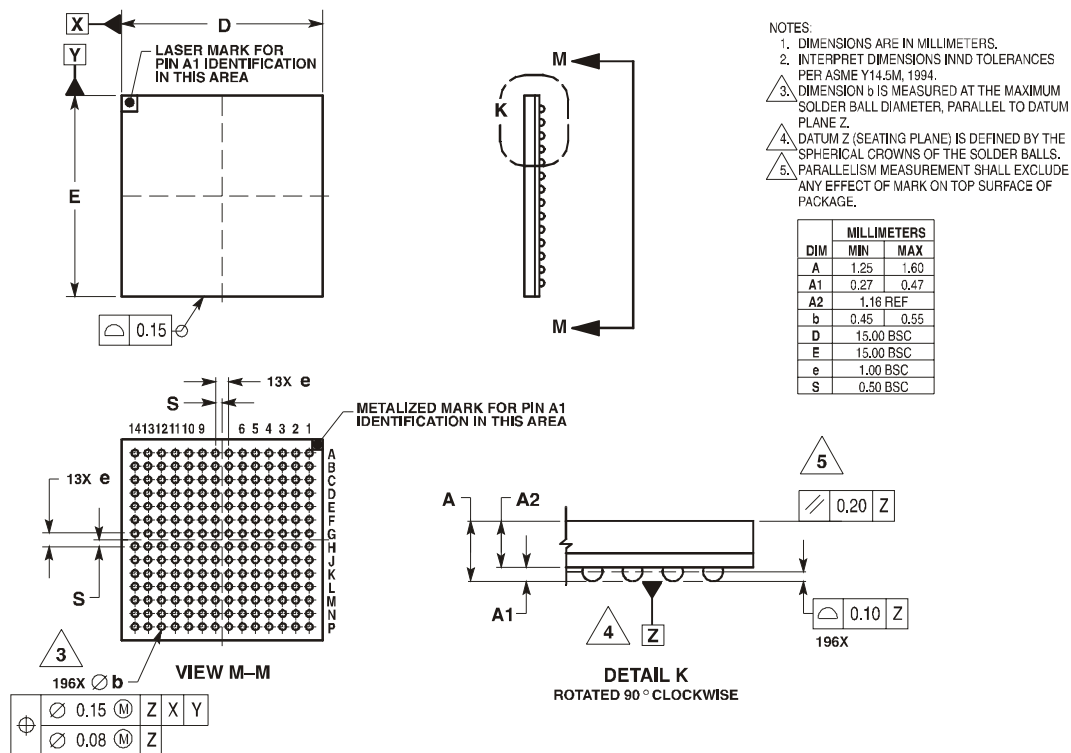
DSP56303 Molded Array Process-Ball Grid Array (MAP-BGA), Bottom View
